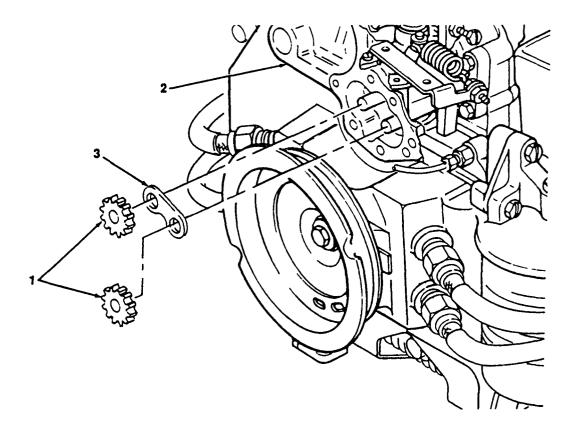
Oil Pump Gears and Wear Plate, Removal and Installation.
